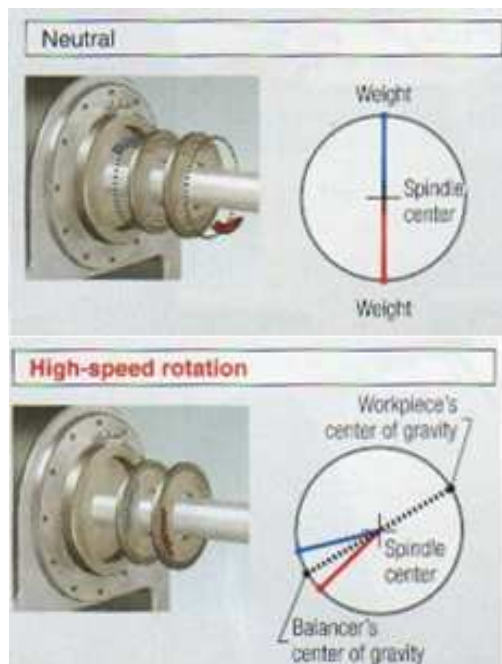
Automatic balancing of the eccentric mass on the machine main spindle.
